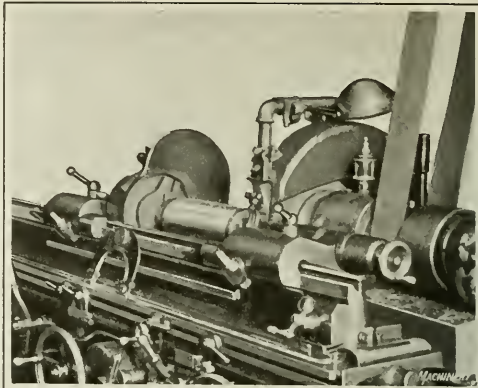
Cylindrical Grinding Operation on the Outside of a Gang of Ball-bearing Rings
